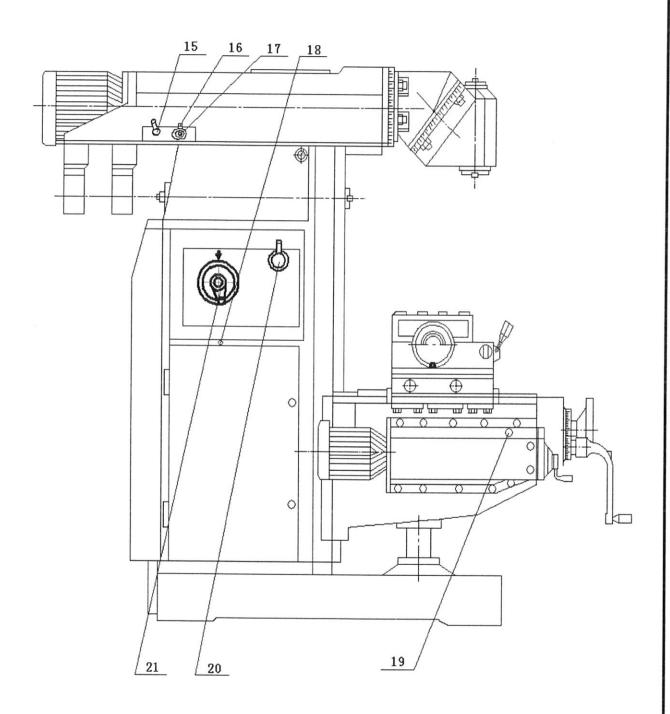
Left view of series X6230 Universal Rotary-Head Milling Machine
